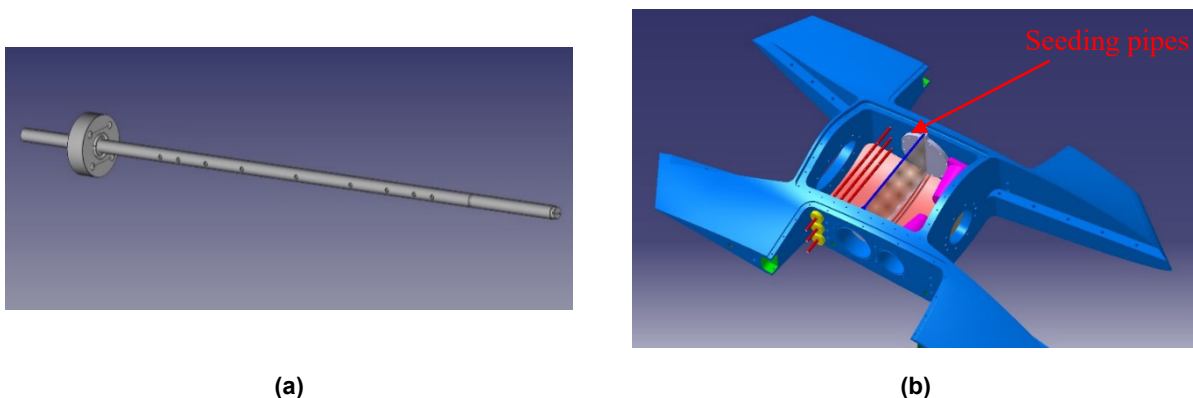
Seeding Pipe View (a) and Nozzle Plenum with the Seeding Pipes Installed (b).
